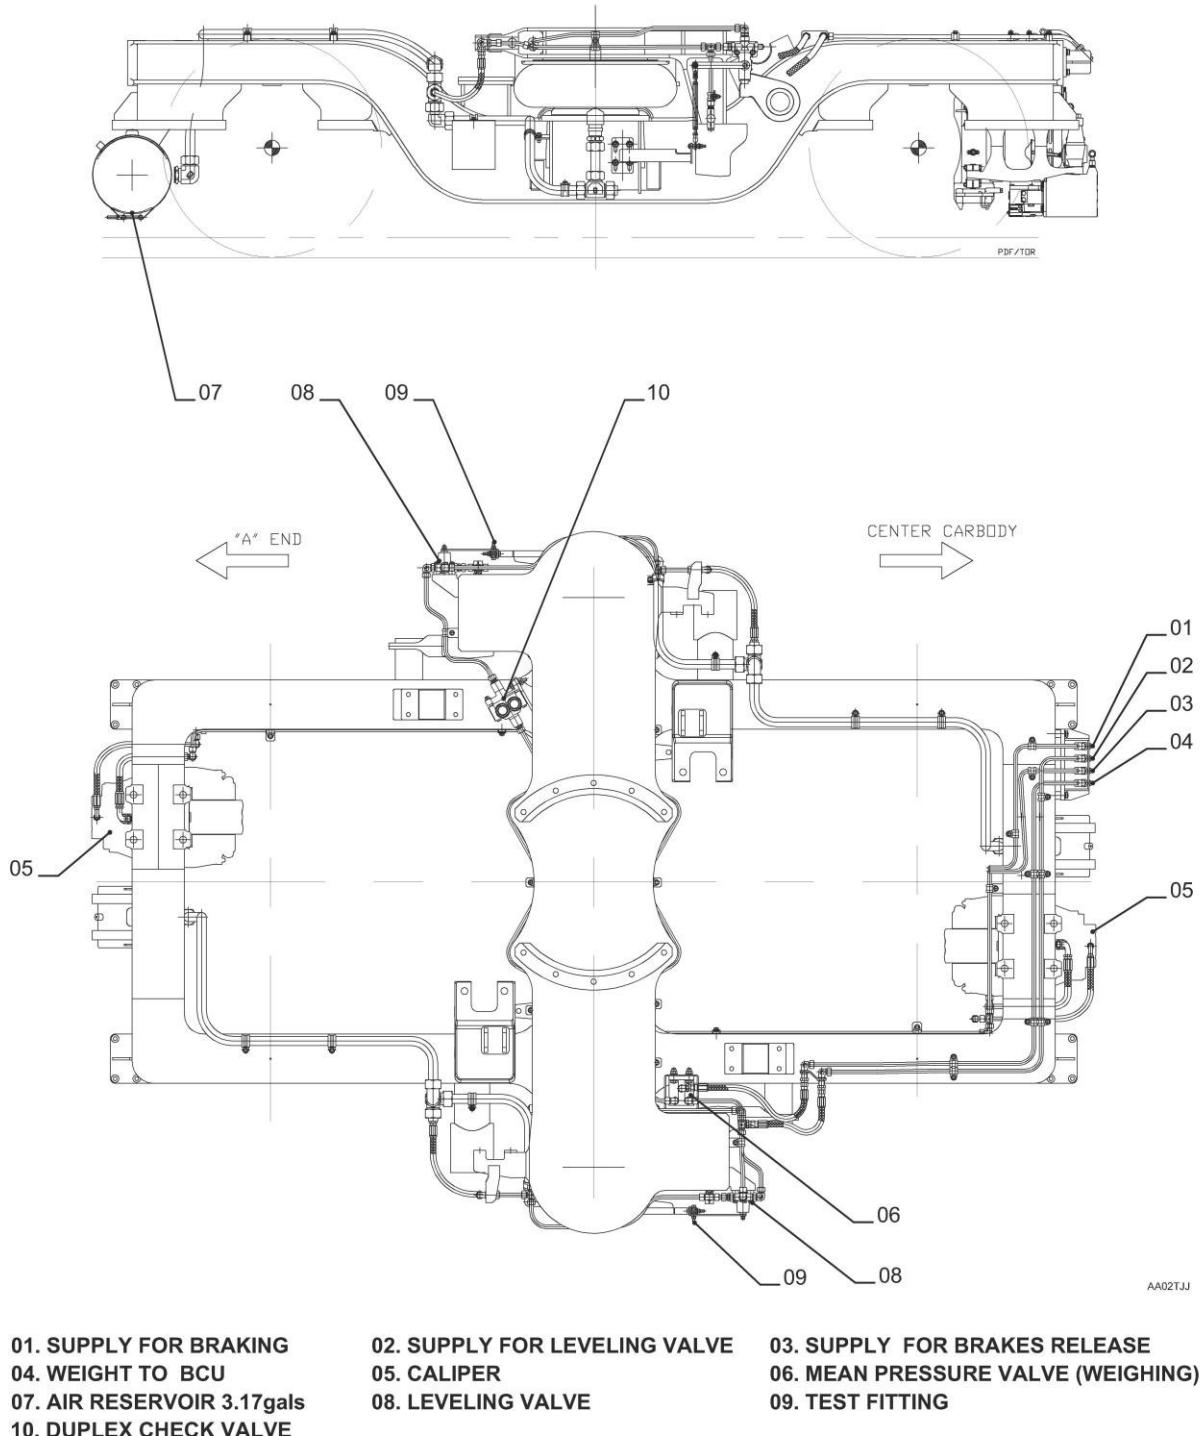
I-02.40 Motor Truck Air Suspension Piping
